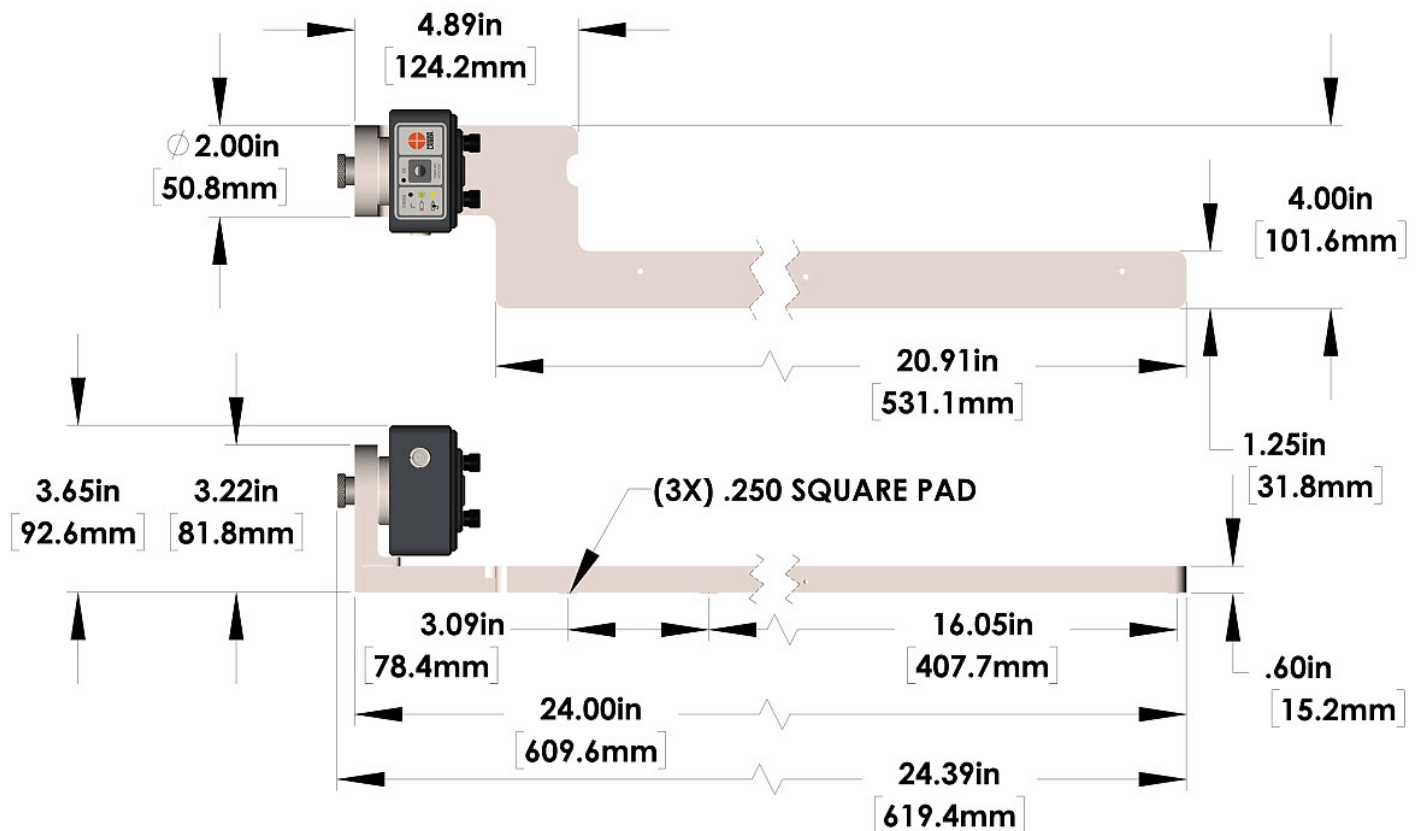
A-703SP-LM Laser Mounting Fixture Dimensions
